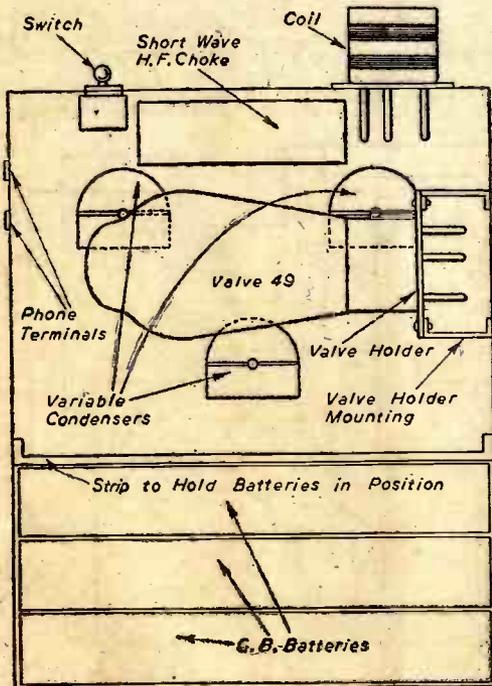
Rear view of the interior of the receiver, showing how the valve is mounted.
